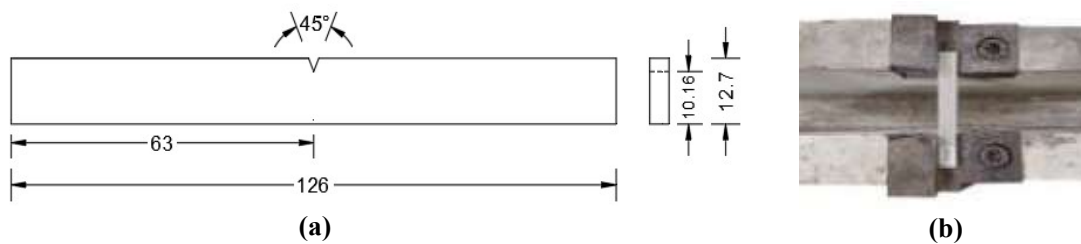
Charpy impact test; (a) Specimen geometry, (b) Machine arrangement
